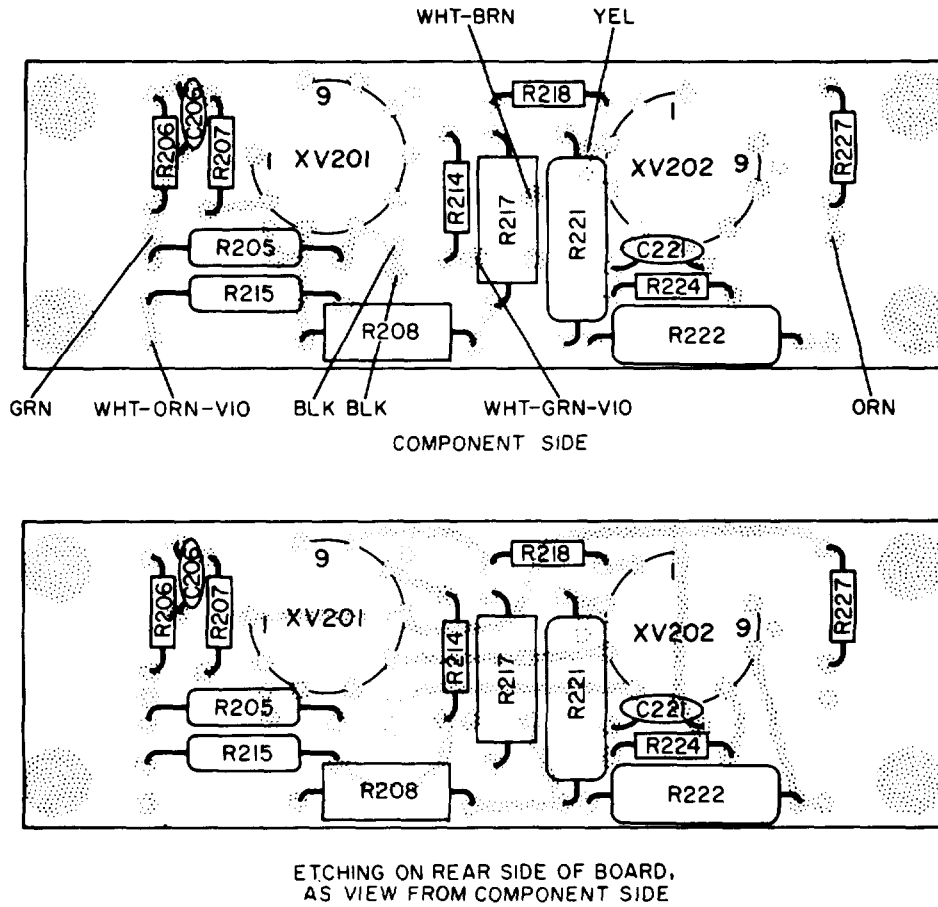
Horizontal Impedance Matching Previous Etched Circuit Assembly, Location of Parts
